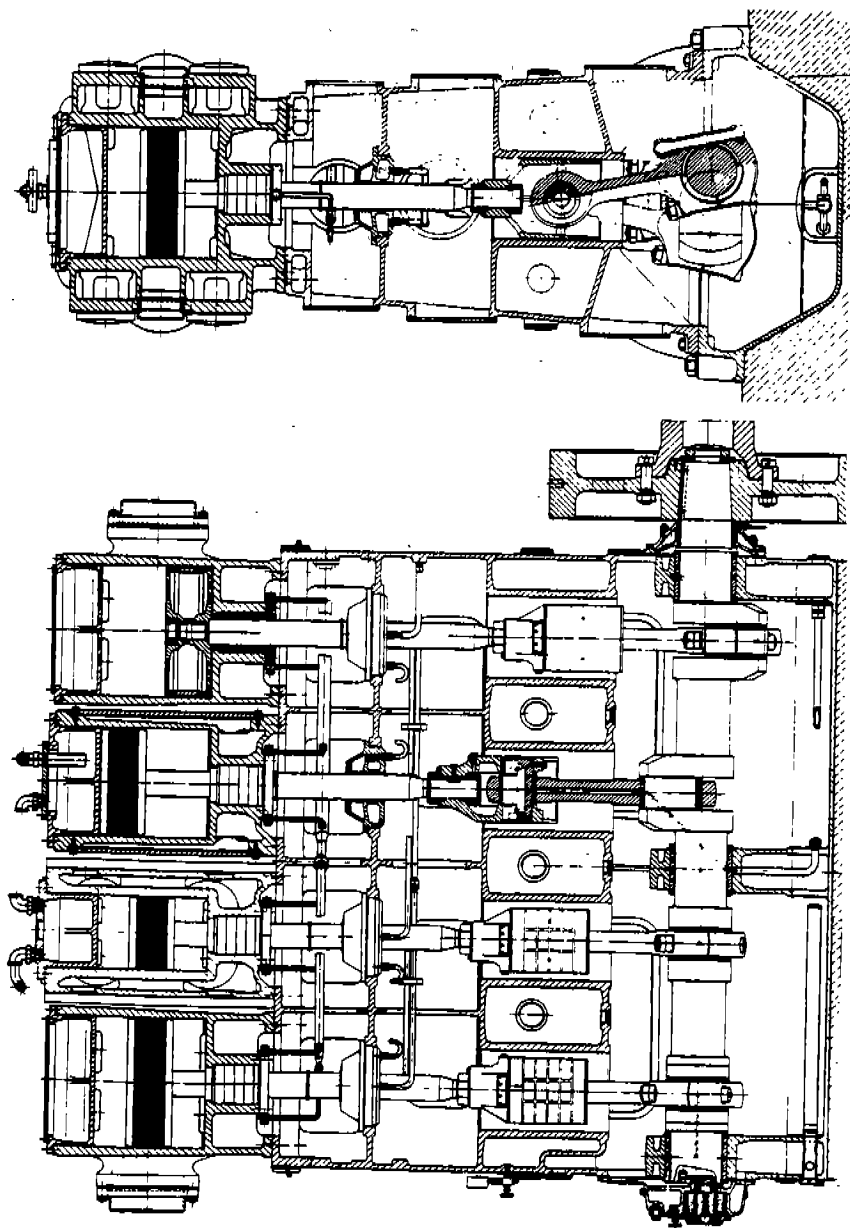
Labyrinth-Piston Compressor for LNG boil-off.
